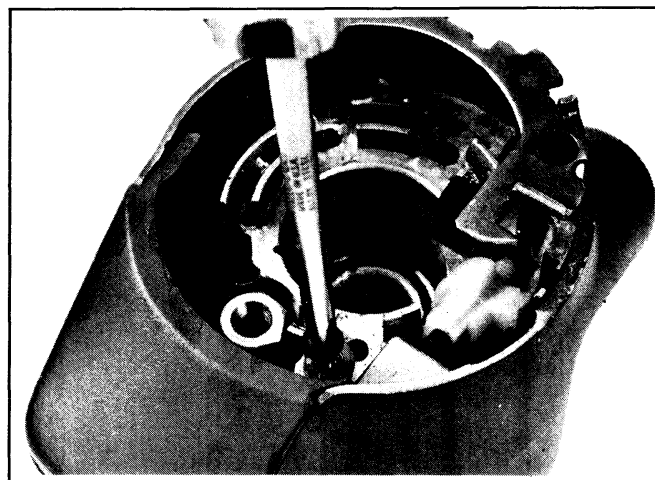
B-82A--Removing Cover Screw and Cover-Chevrolet
